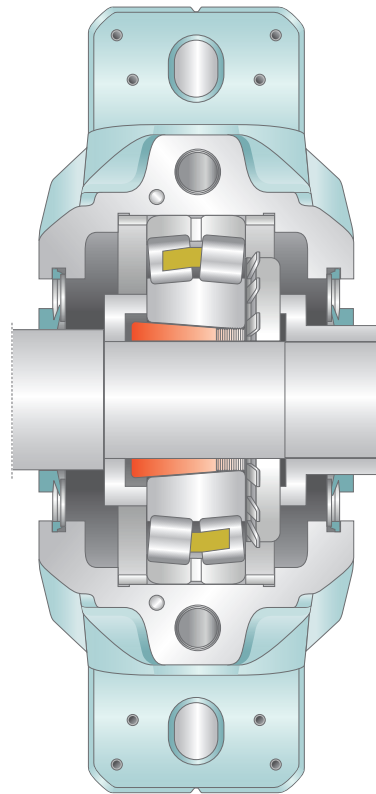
Bearing with withdrawal sleeve on a shouldered shaft
